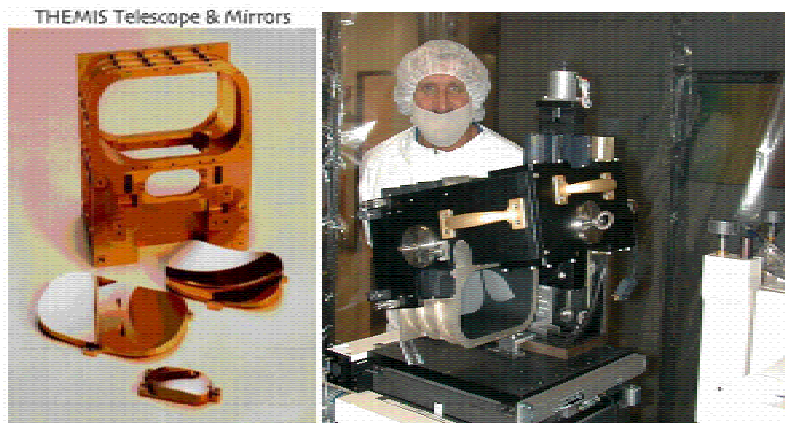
THEMIS diamond-turned “bolt-together” telescope components prior to and after assembly.
